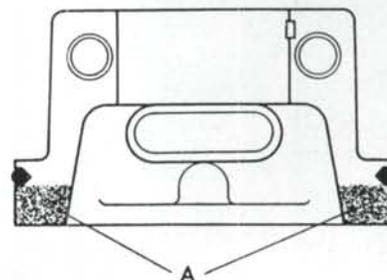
When installing front main bearing cap on three-cylinder engines, apply light coat of RTV silicone sealer to mounting surface of cap indicated by shaded area "A".
